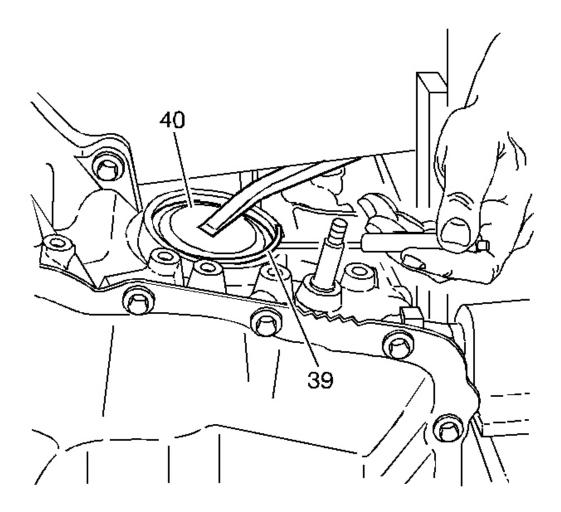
Removing/Installing Reverse Servo Cover Snap Ring Courtesy of GENERAL MOTORS CORP.
